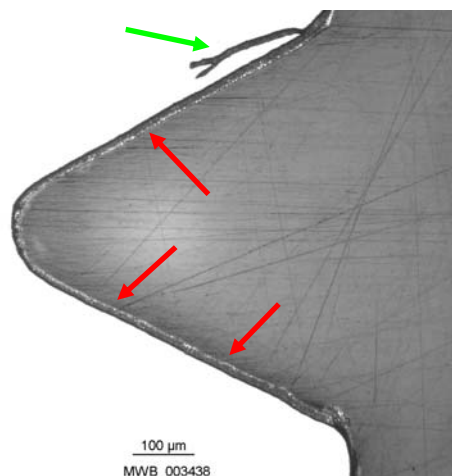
Undamaged coating (red arrows) and incipient cracks (green arrow) on the thread flanks.
